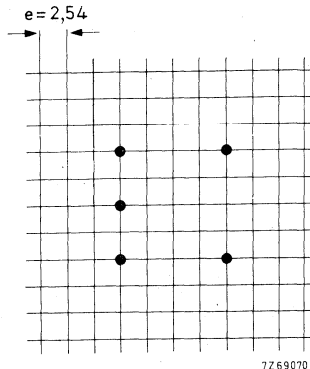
Hole pattern for mounting on a printed-wiring board, hole dia $1,3 + 0,1$ mm
